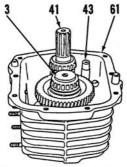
When disassembling KBW-10 transmission, first remove output shaft assembly (3) followed by Intermediate shaft assembly (43) and input shaft assembly (41), in that order.
